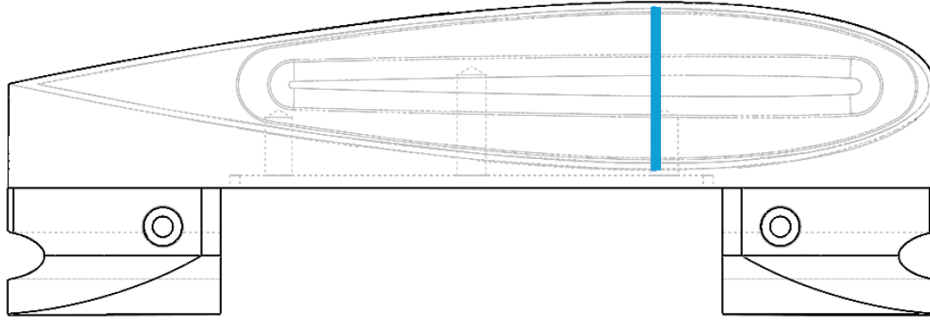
Detailed views of showing position of simplified core bond line (blue).
